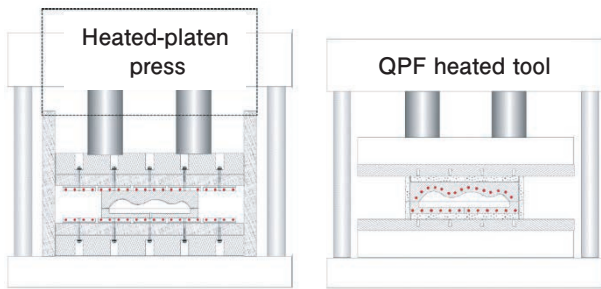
Schematic of the fixture for QPF¹⁰⁾.
